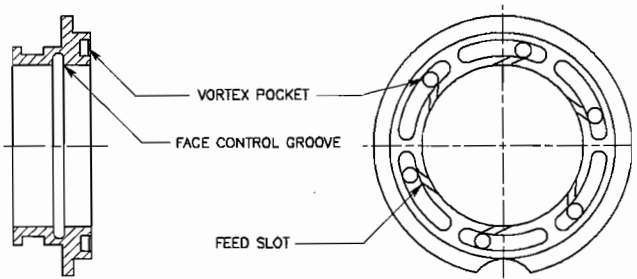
Hydrostatic Throttle Bushing Geometry Improvements.
